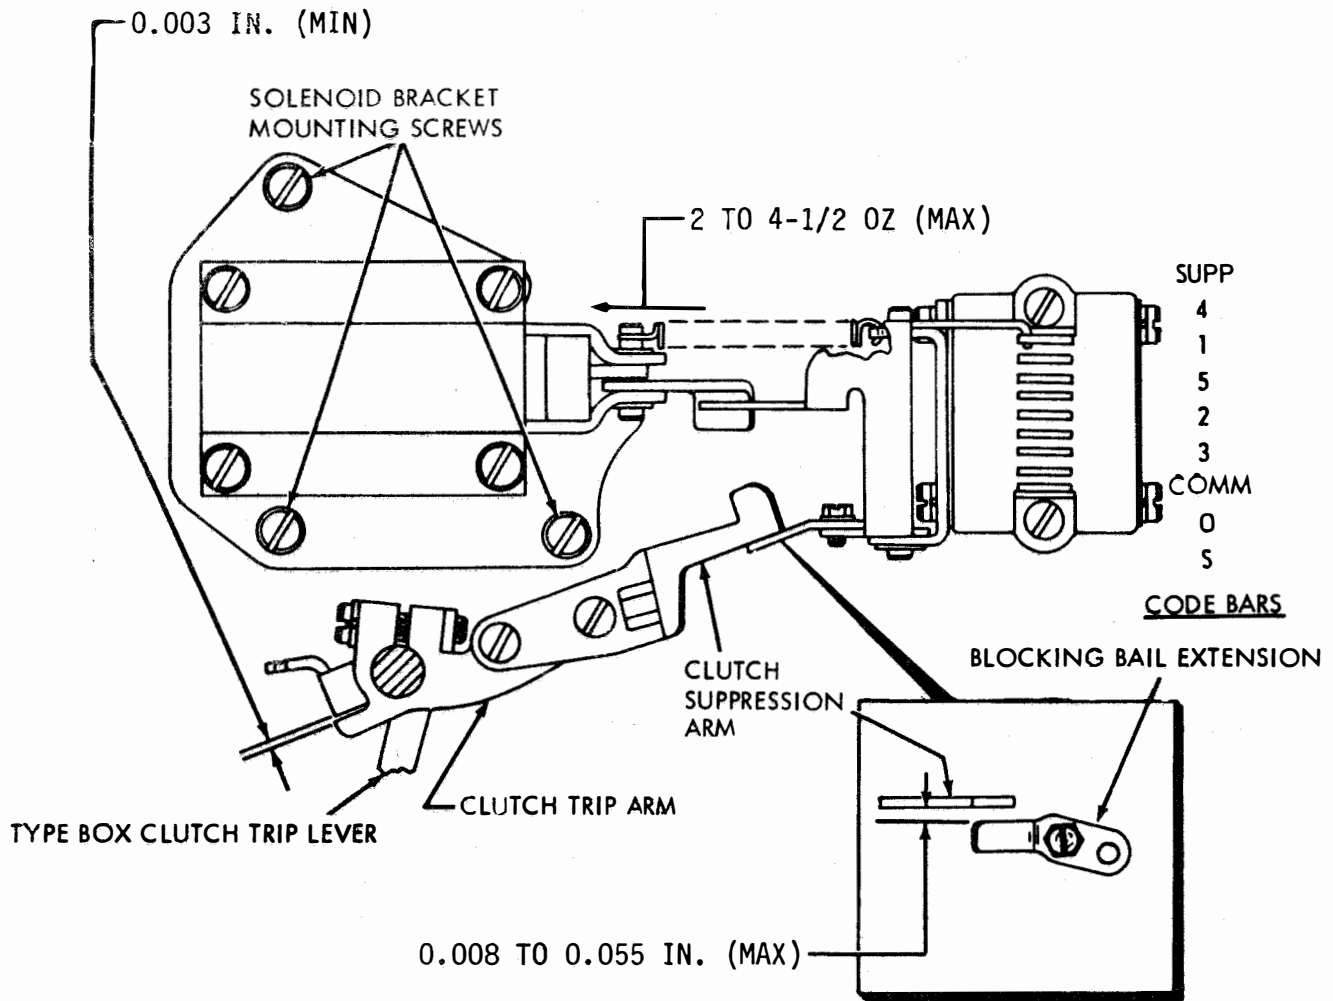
Blocking Bail, Off-Line Stunt Shift Solenoid Spring, and Type Box Clutch Suppression Arm, Front View
